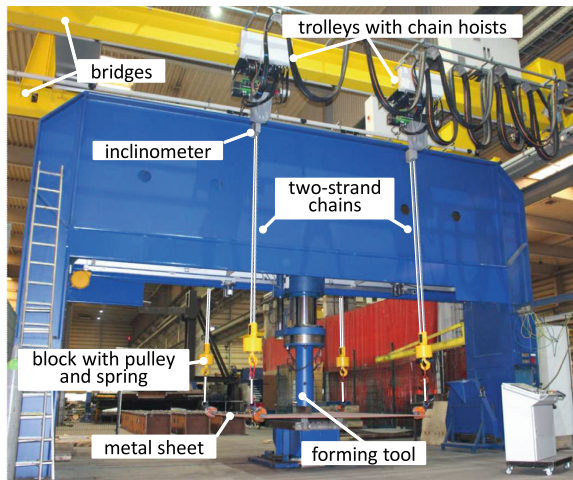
Four-chain crane manipulator for positioning metal sheets under a forming tool.
